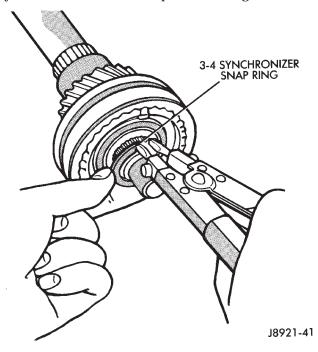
Remove 3-4 Synchronizer Snap Ring
